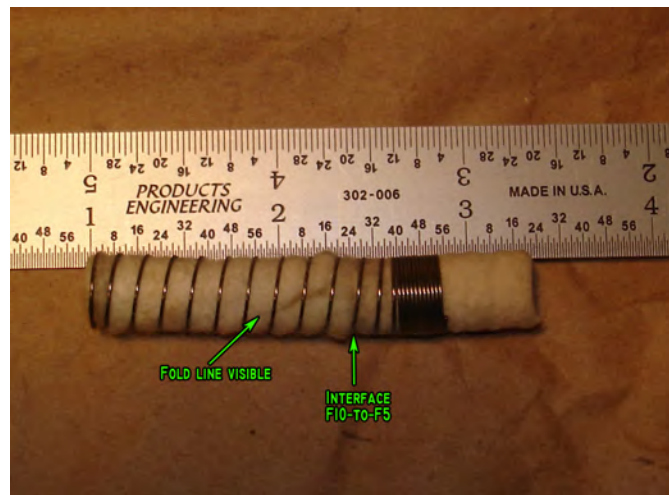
Parts of a newly made felt wick using the original equipment spring retainer.
